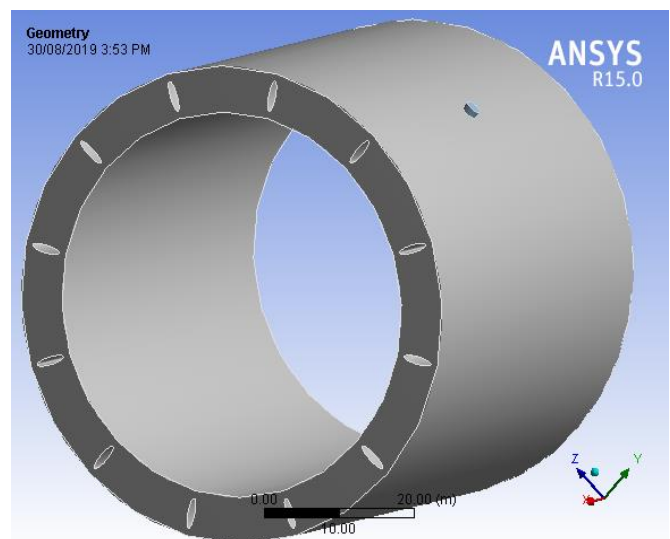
3D model of CFB boiler tube with elliptical shaped perforations
